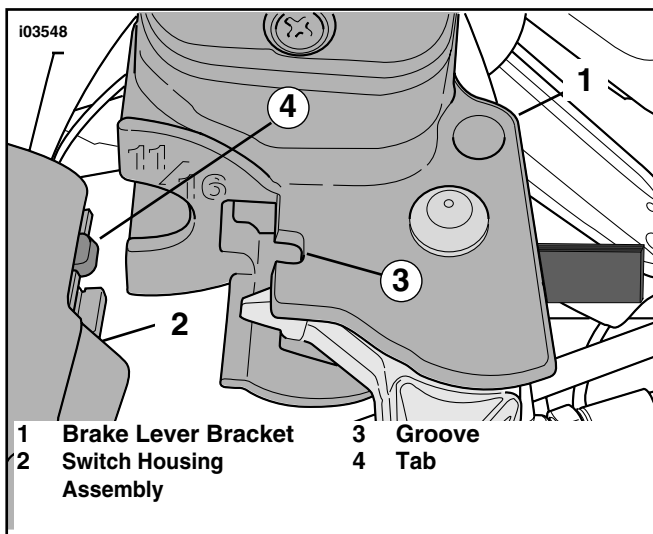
Installing Brake Lever/Master Cylinder Assembly to Right Switch Housing Assemblies
